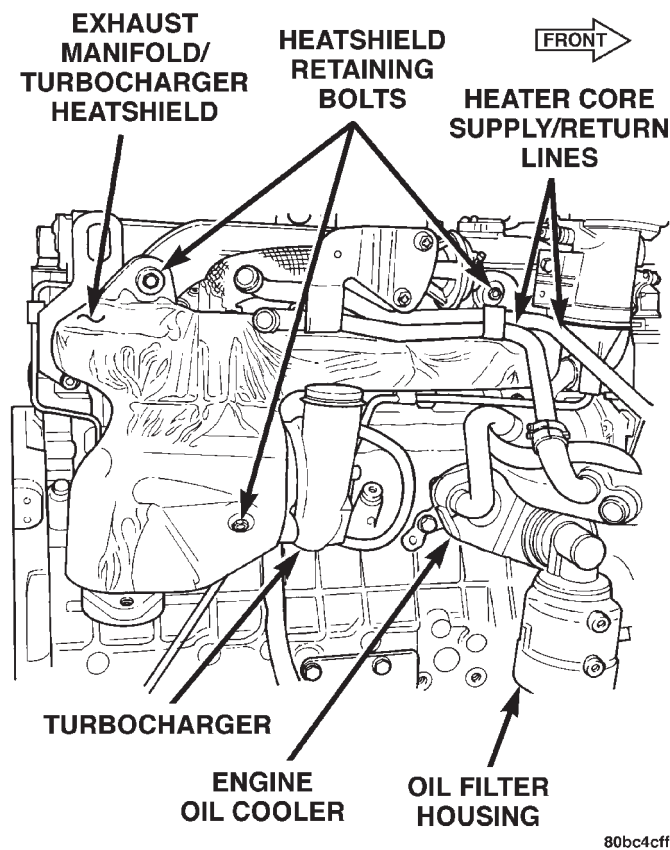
Exhaust Manifold/Turbocharger Heat Shield
